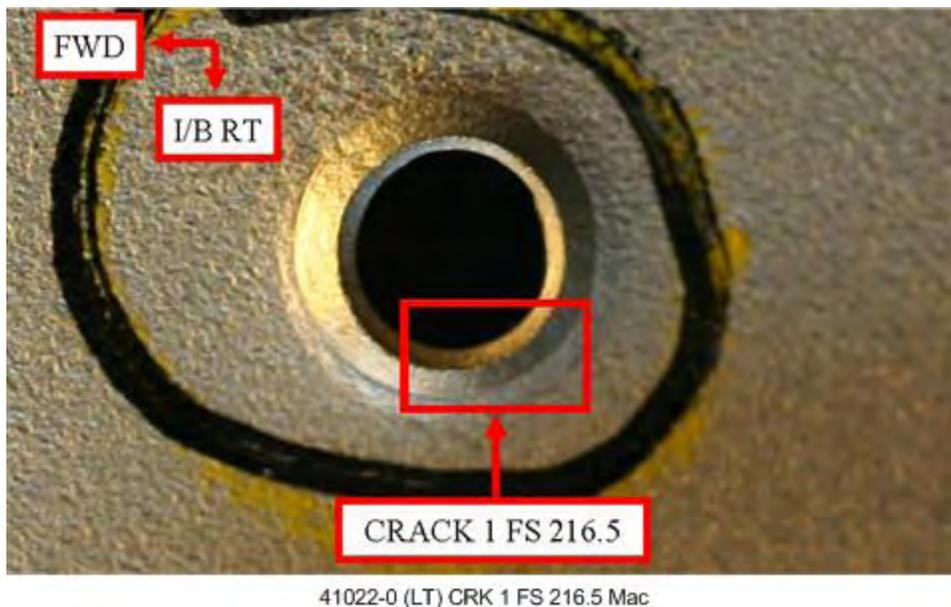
Macroscopic View of Crack 1 on the Left Inboard Floorboard Support Assembly FS 216.5
